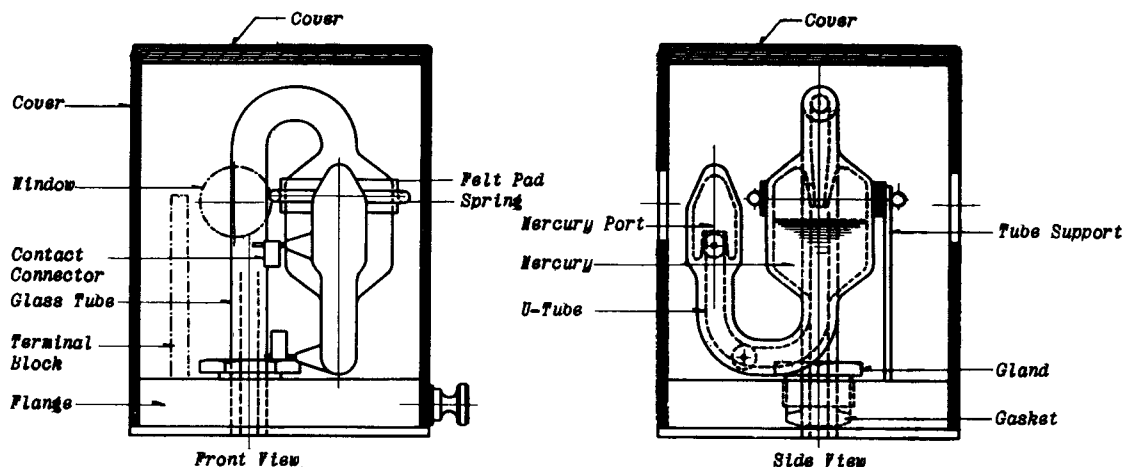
FRONT AND SIDE CROSS SECTION VIEWS OF CONTACT MAKING PRESSURE MANOMETER
